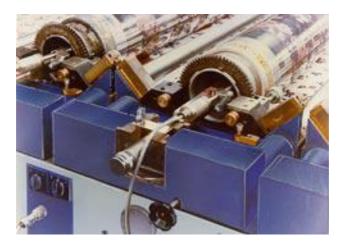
Open bearing (Johannes (formerly Peter) Zimmer)
